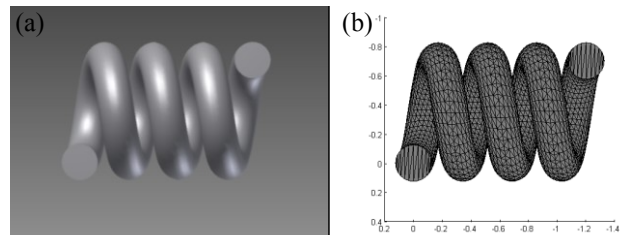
(a) 3-D CAD drawing of coil (b) coil shape imported to the in house developed MATLAB code.
